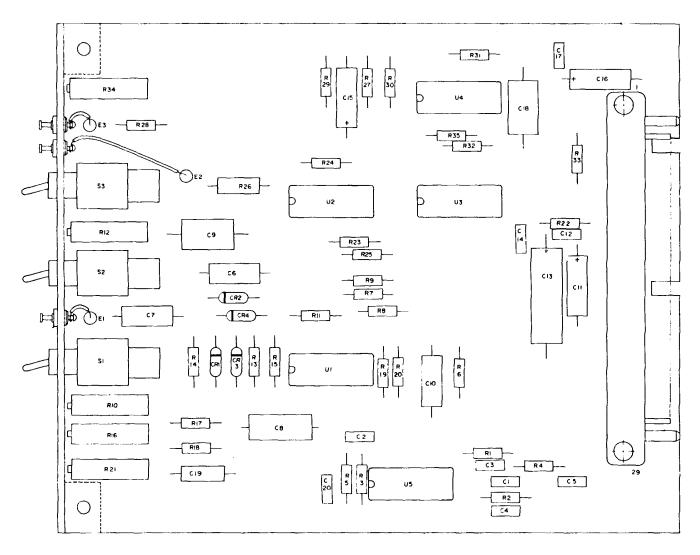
Ident OSC/MOD Mixer Circuit Card Assembly, 1A4A2 Parts Location Diagram
